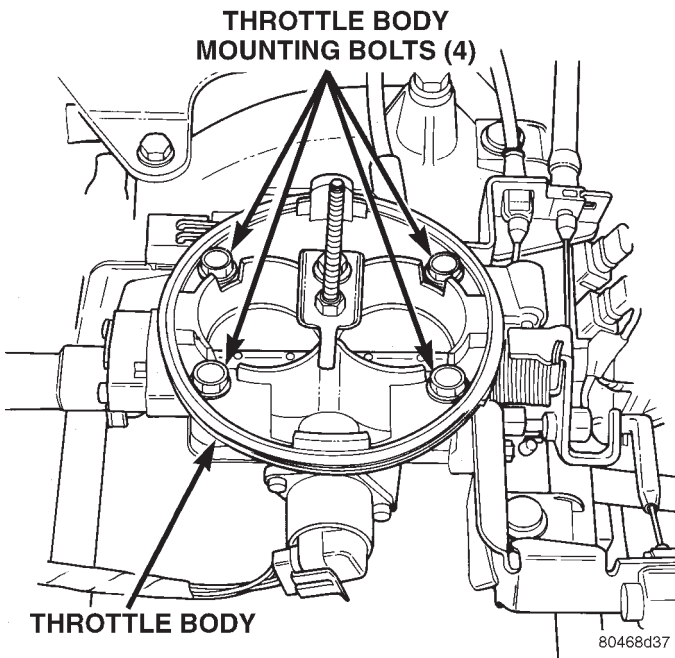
Throttle Body—5.2L/5.9L Engines—Typical
